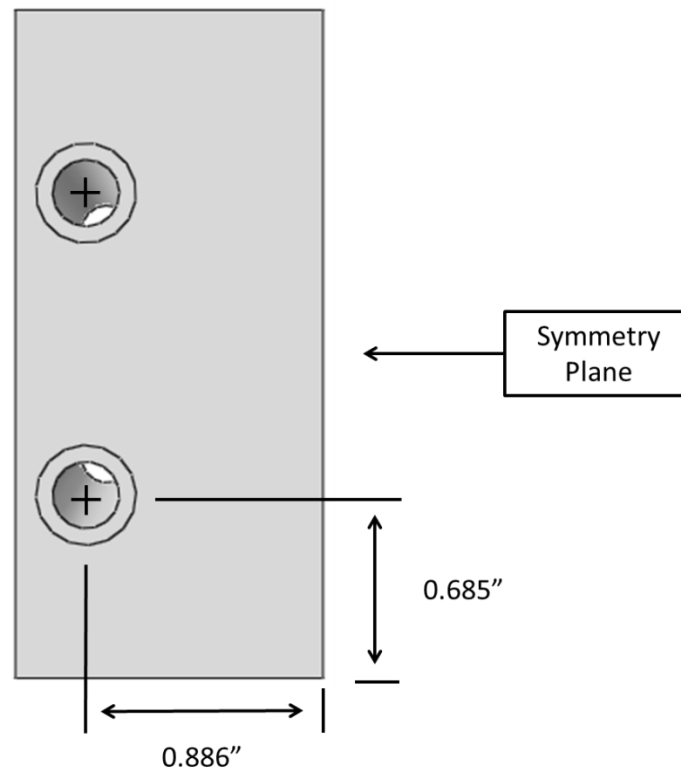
ASTM D6641 one-eighth symmetry model of test fixture bolt-hole locations
